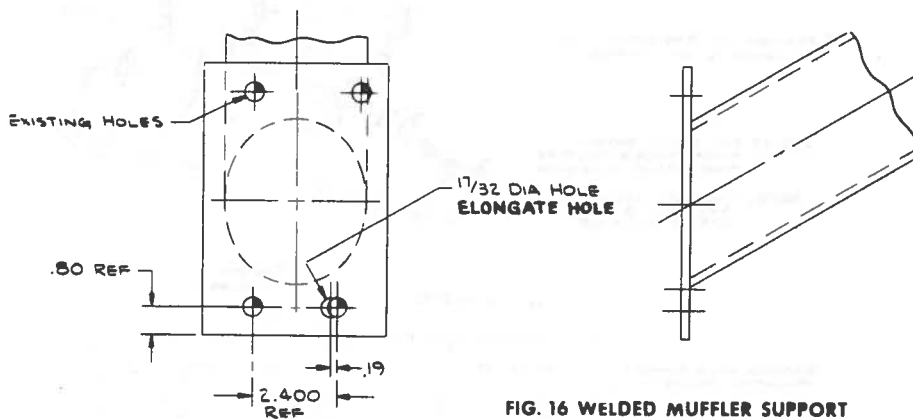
WELDED MUFFLER SUPPORT
